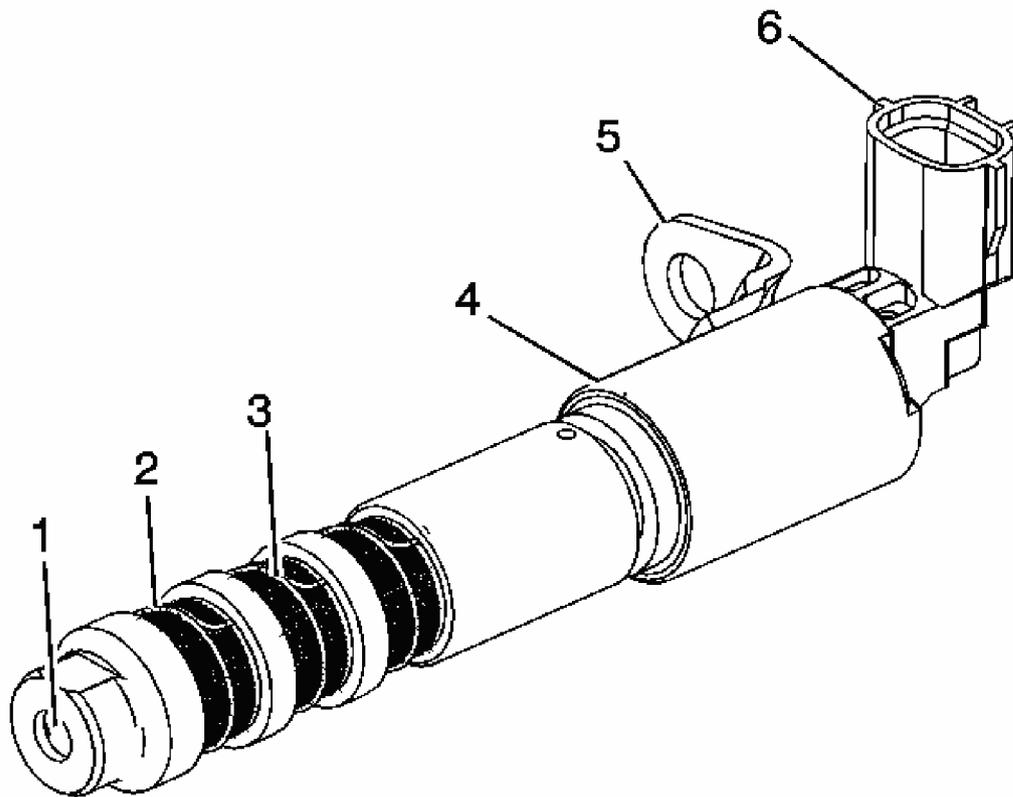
Identifying Camshaft Position Actuator Oil Control Valves Inspection Areas
